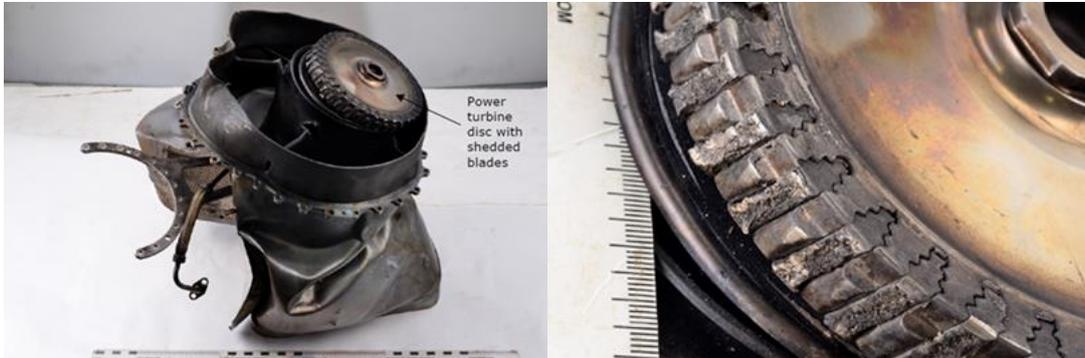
All 37 blades on the free turbine had just about identical fracture surfaces at the root of the blade. Photo: DNV GL/NSIA
